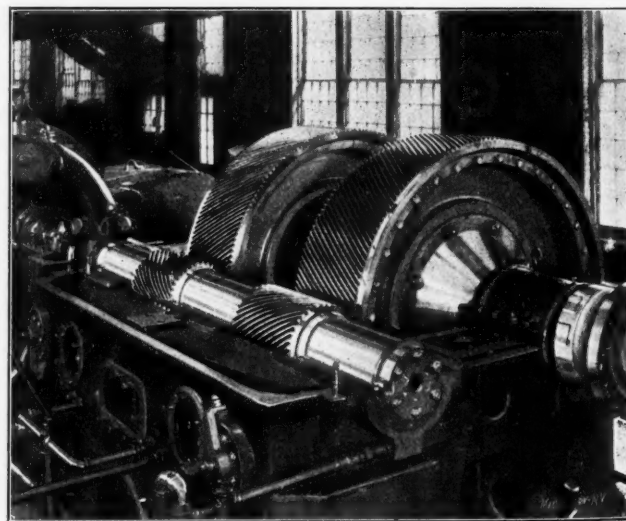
The Gearing with the Cover and the Top Half of the Floating Frame Removed
